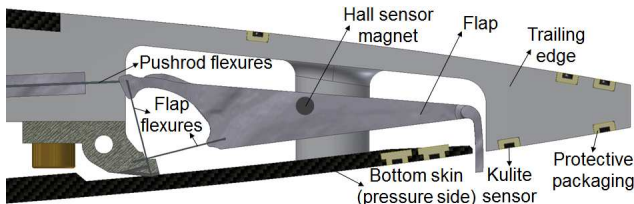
Side view of the flap showing the cross-axis flexural pivot.
